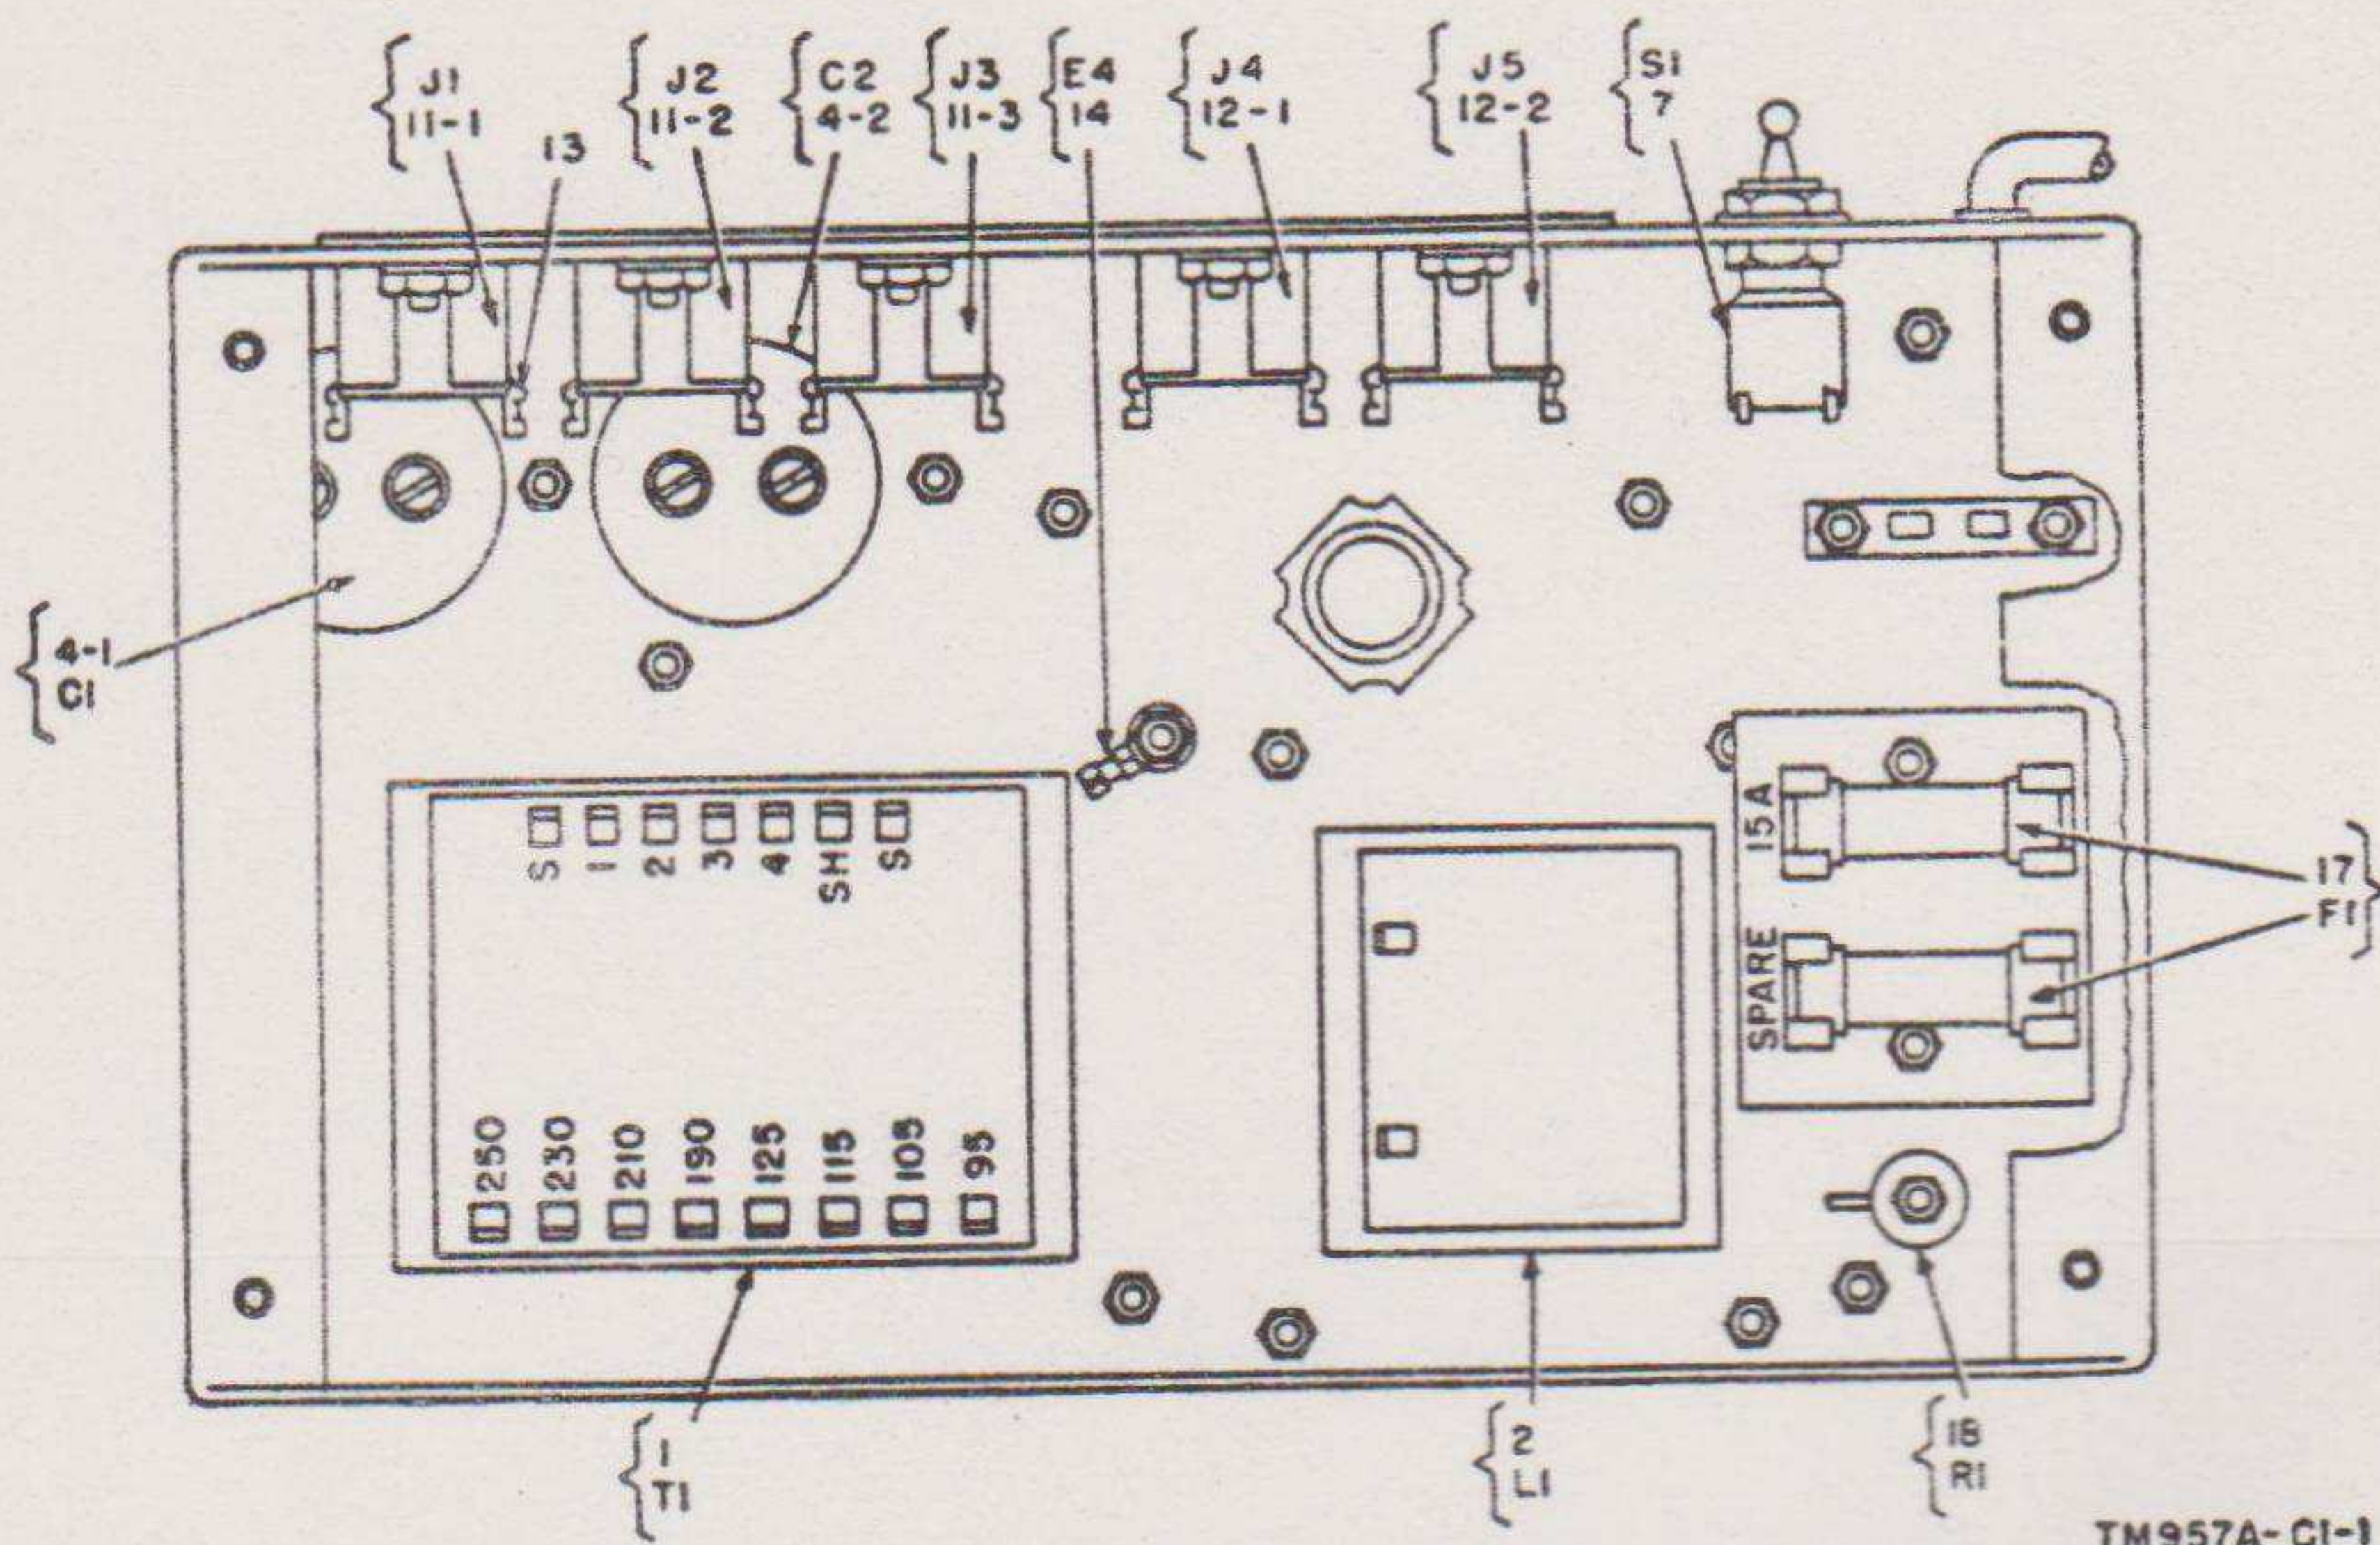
(Added). Rectifier RA-87-A. bottom view of chassis, parts location diagram.
